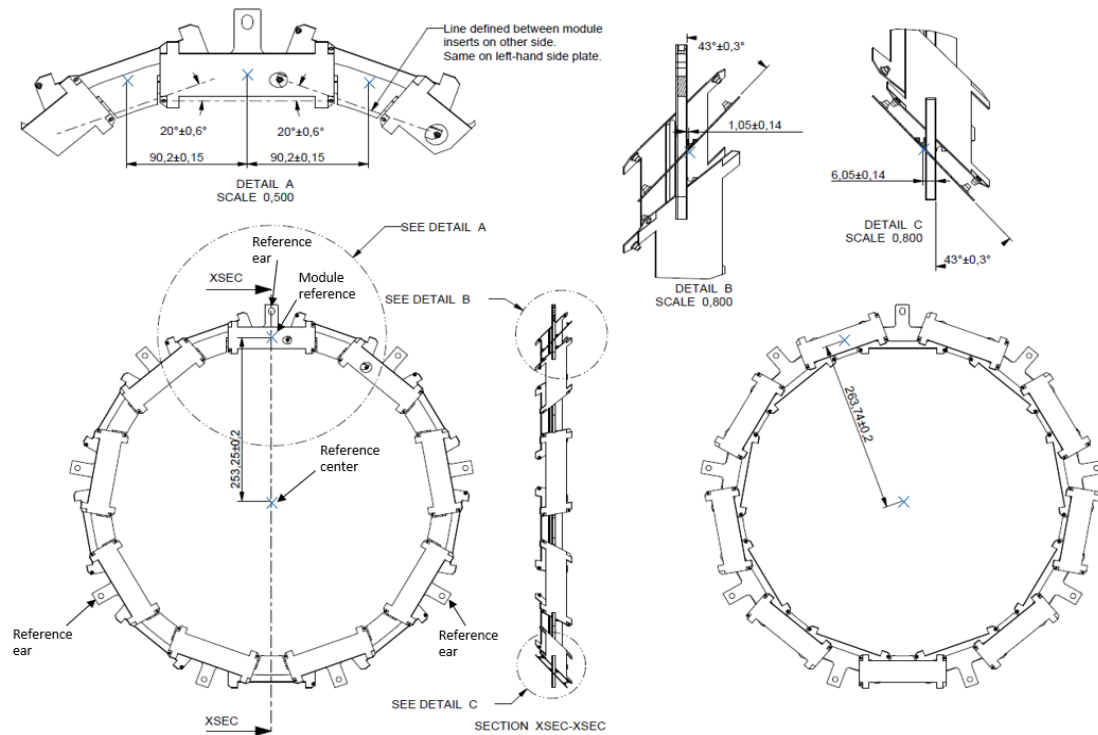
Manufacturing tolerances for a 47 ° ring.
